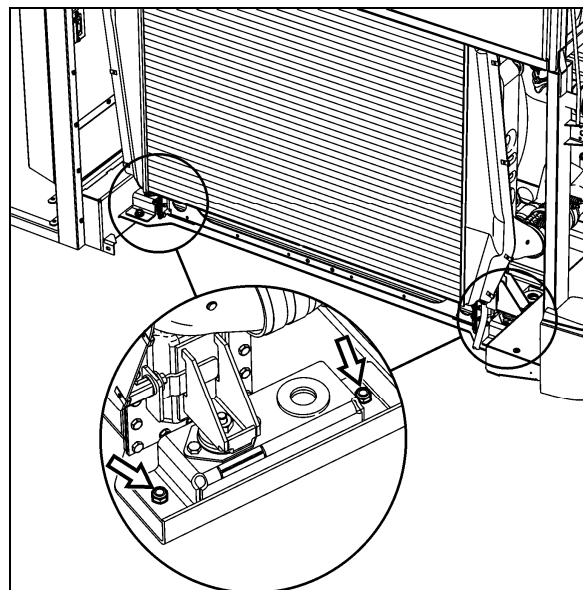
RADIATOR ASSEMBLY LOWER MOUNTING FASTENERS
